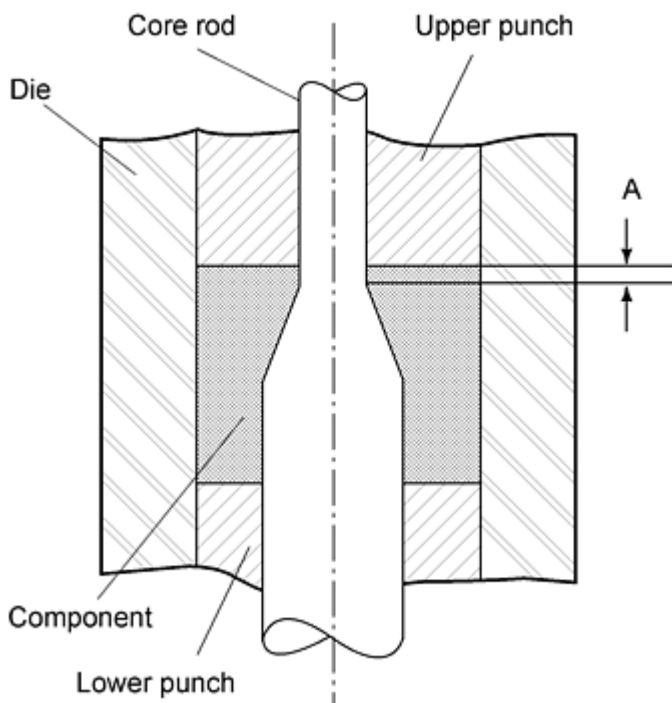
Tapered hole design for P/M parts. Source: Ref 3
